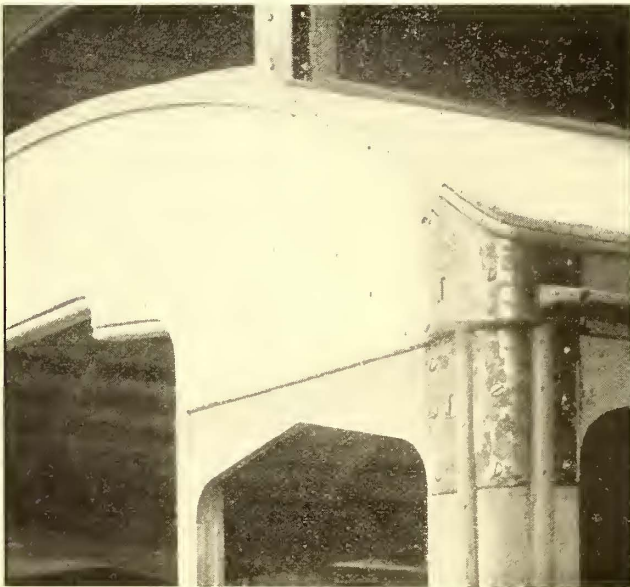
CORNER PLATE DEFENDING JOINT BETWEEN POSTS AND LETTER BOARD.
